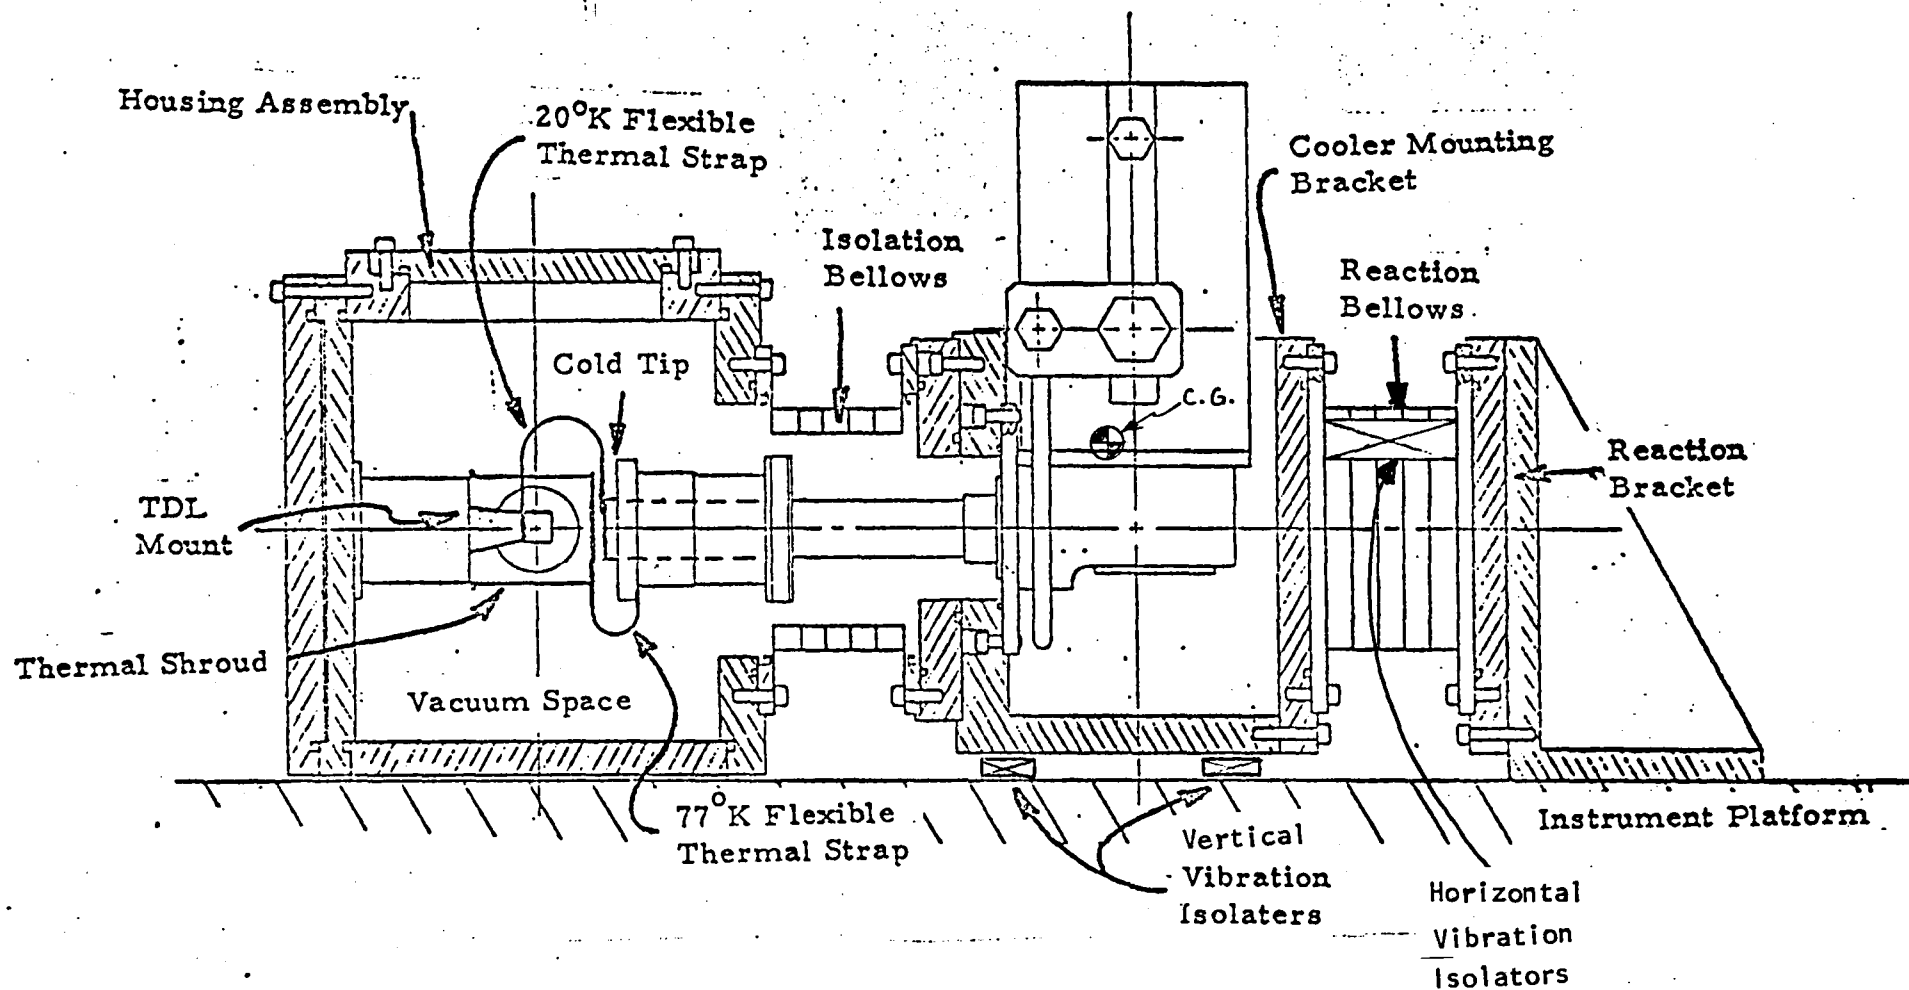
LHS Cooler Test Bed Hardware Assembly (Side View)
